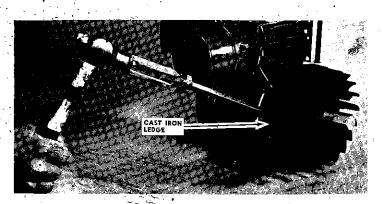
Looking between the flywheel and the engine from the left side (½ way up from base) you'll find a small ledge of cast iron while all the rest is stamped metal (also see ledge in Photo 21). Tap a large screwdriver between that ledge and the flywheel and leave it wedged in place.
